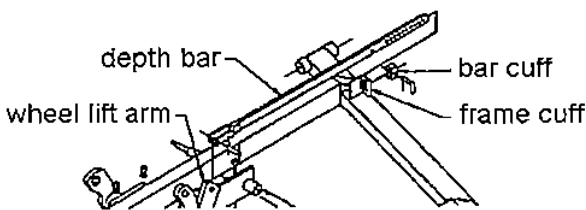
DEPTH CONTROL ASSEMBLY
